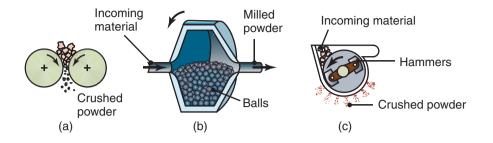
Methods of mechanical comminution to obtain fine particles: (a) roll crushing, (b) ball mill, and (c) hammer milling.
